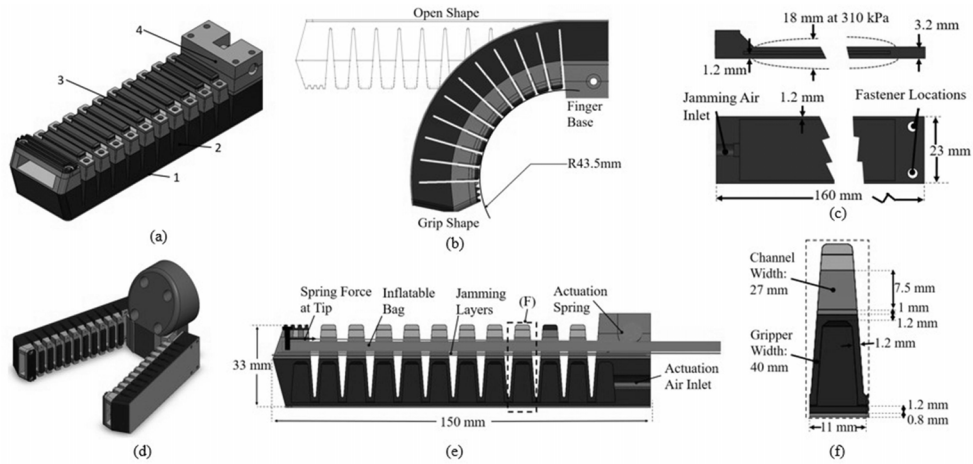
Design Overview. (a) Isometric View of the Positive Pressure Jamming Gripper Showing (1) Strain Limiting PETG Layer, (2) TPU Bellows, (3) Jamming Constraint Frame, (4) Actuation Spring Bearing Mount. (b) Open and Closed States. (c) Jamming Bag Key Dimensions. (d) Dual Finger Gripper Designed for UR5 Robot. (e) Gripper Sectional View. (f) Detailed View of Inflatable Bellows.
